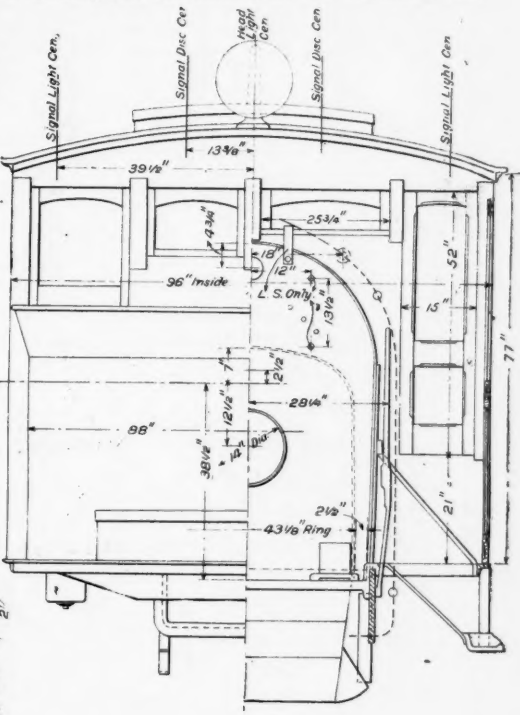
Half Side Elevation at Tank End and Half Cross-Section through Cab.
